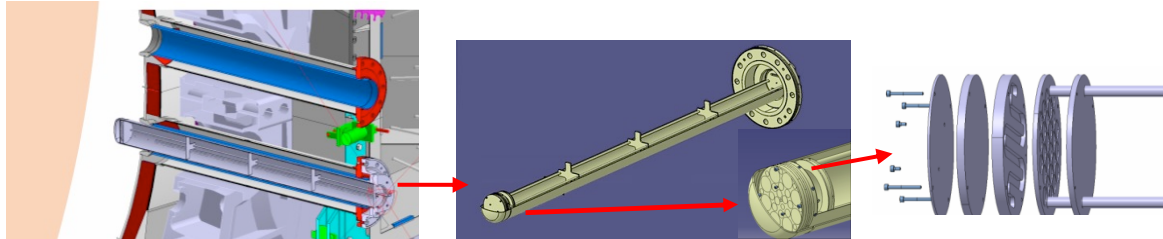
The LTIS assembly holder where the samples were irradiated (from the left: holder tube in the tokamak, holders in the tube, arrangement of holders)
